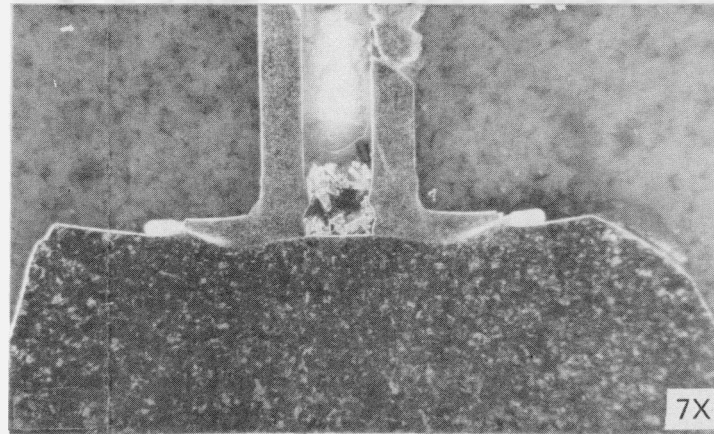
Resistance Welds Joining Tubes to Sample Surface
